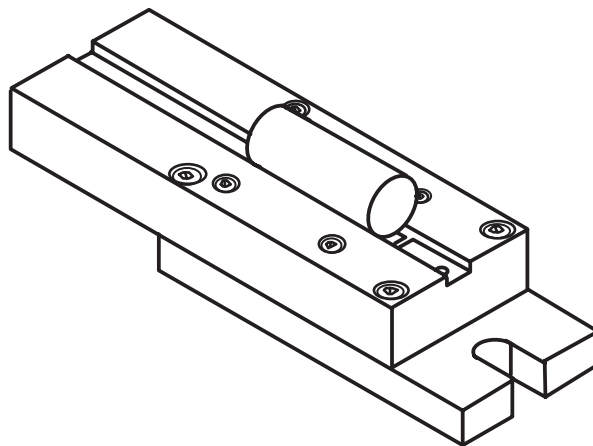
Impact device with a cylindrical mass piece in 3D
